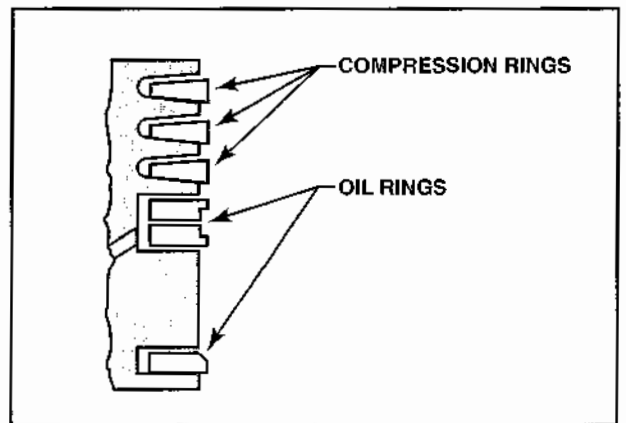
Compression rings are installed in the upper piston ring grooves to help prevent the combustion gases from escaping. Oil rings, on the other hand, are installed near the middle and bottom of a piston to control the amount of oil applied to the cylinder wall.
